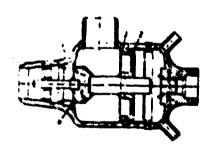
Check valve for a section pipeline, dy 2 76 cm.
